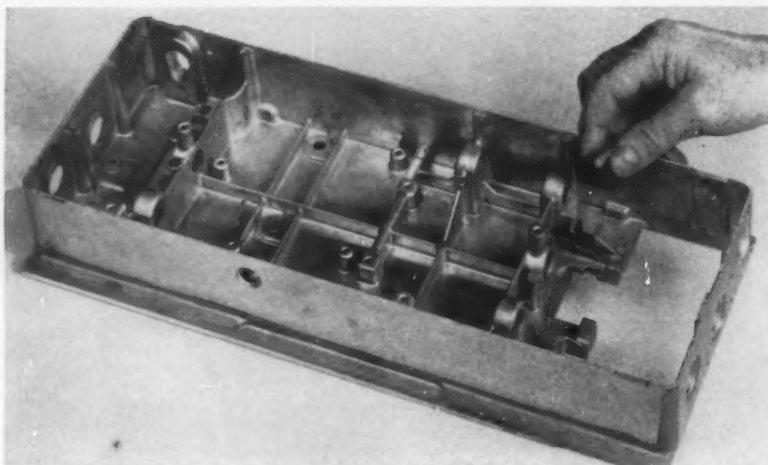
Two powdered-metal inserts provide wear resistance for this sewing-machine base plate
